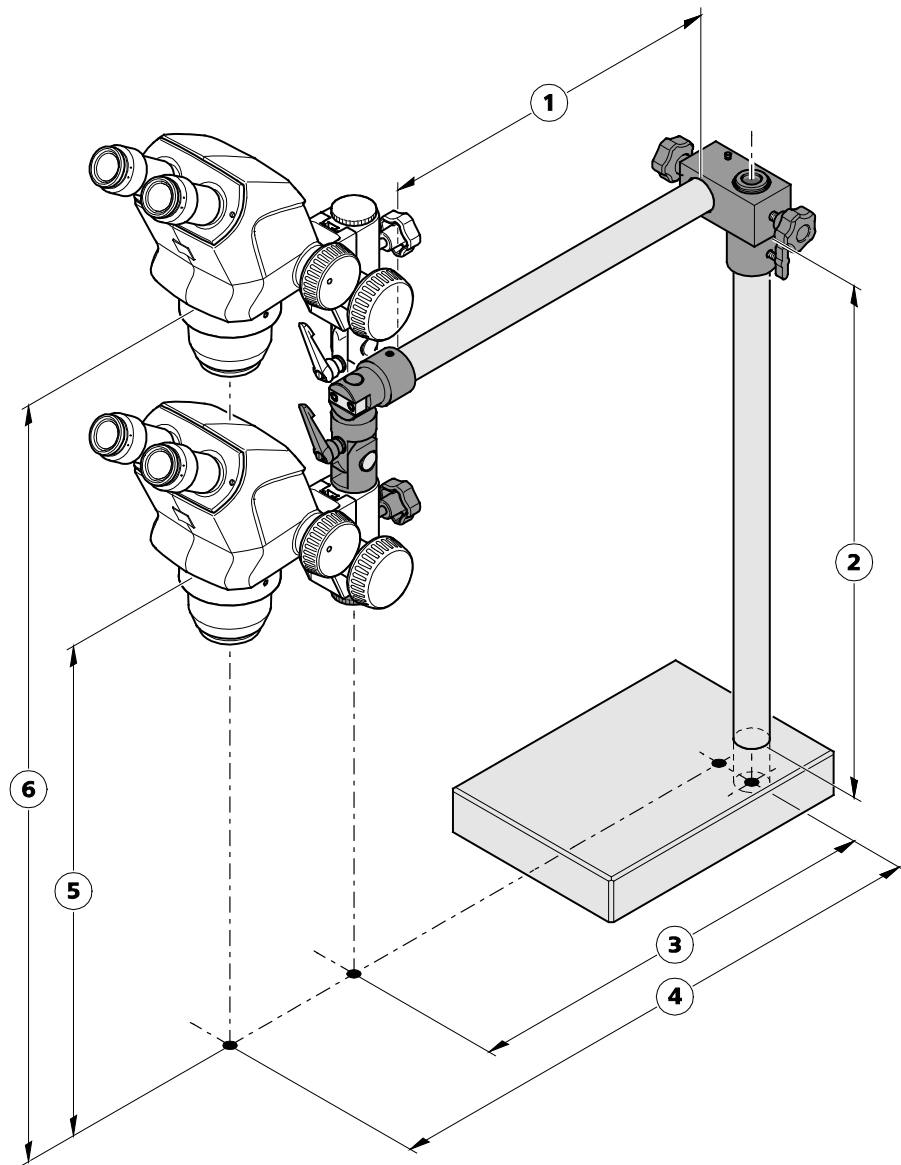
Dimensions and workspaces of Boom Stand B with microscope body
